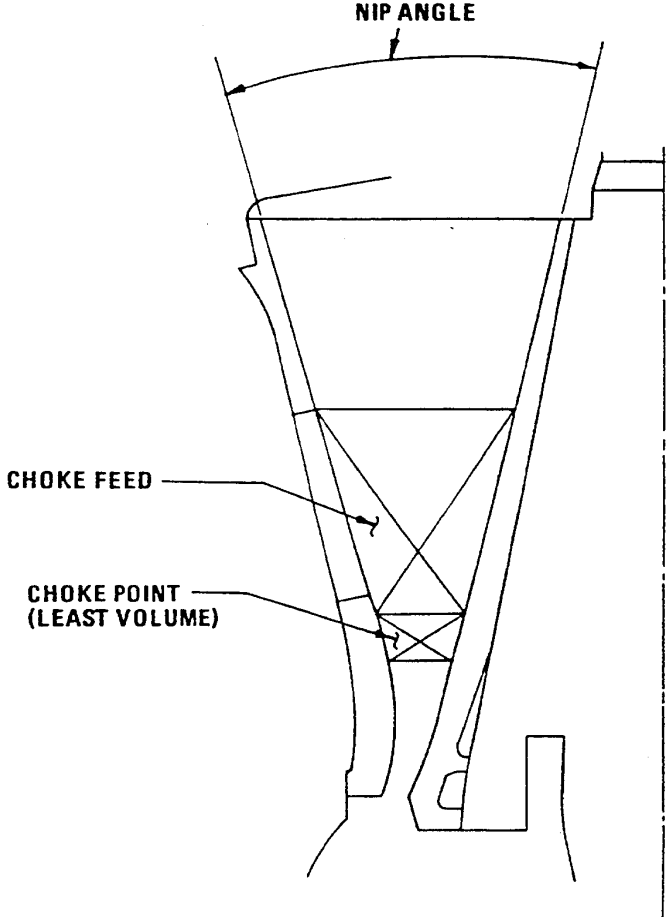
NIP ANGLE, CHOKED FEED, CHOKED POINT.
